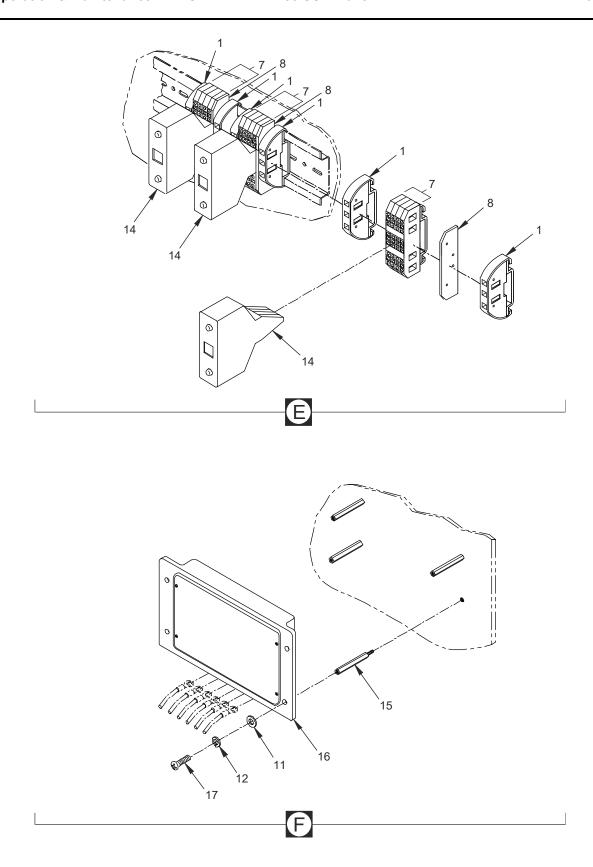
Barrier Panel Assembly (Sheet 4 of 7).
